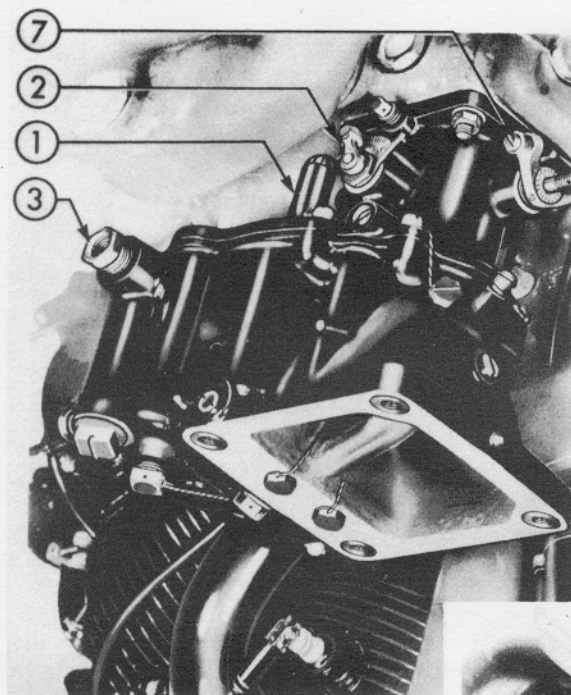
Finding Top Dead Center. (Sheet 2 of 2 Sheets)
